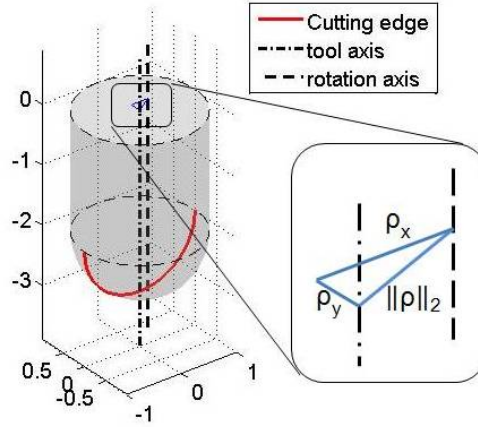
Model of a 2-fluted ball-end tool, cutting edge and the rotation axis with parallel offset
